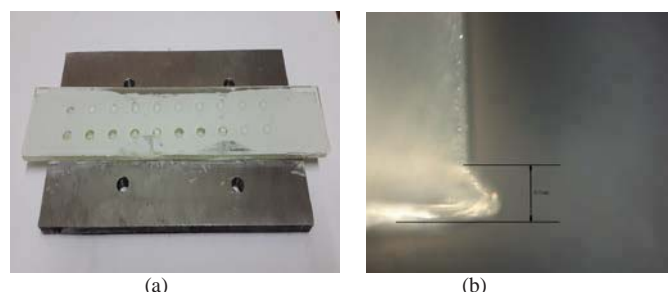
(a) Drilled holes (b) Edge chipping thickness determined from machined rod using video measuring system.
